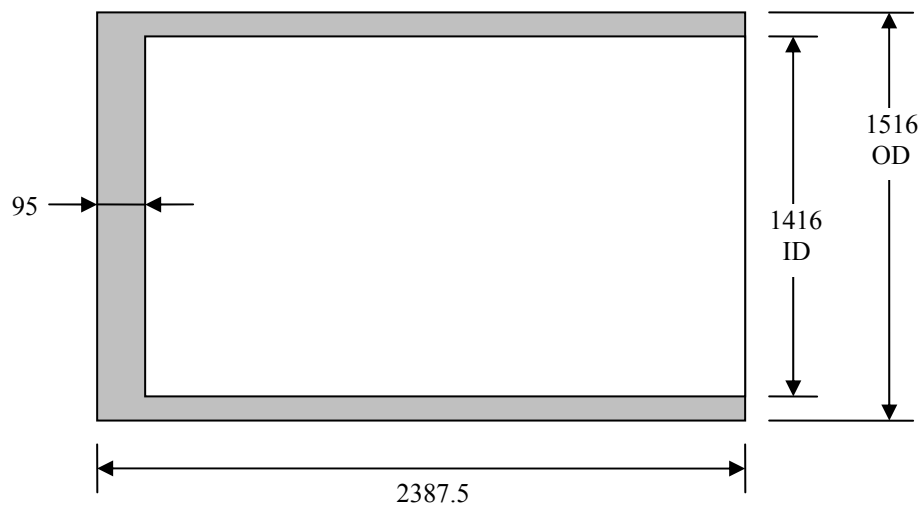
Dimensions of Inner Vessel (side view, units of mm)
